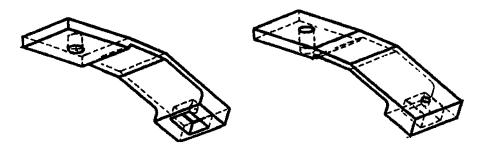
Schematic configuration of a cantilevered flexure shaped to interface with the boss of Fig. 9.35 and the cylindrical mounting for a circular mirror.
